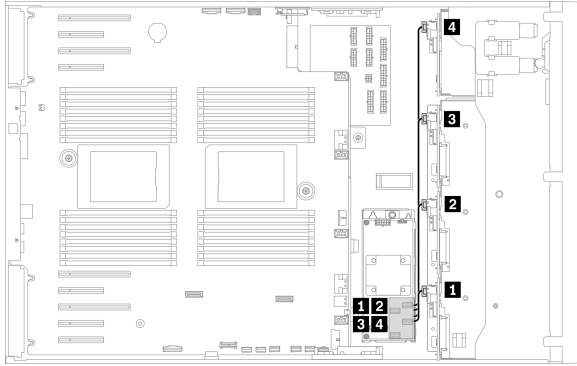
SAS/SATA cable routing to CFF RAID/HBA adapter
